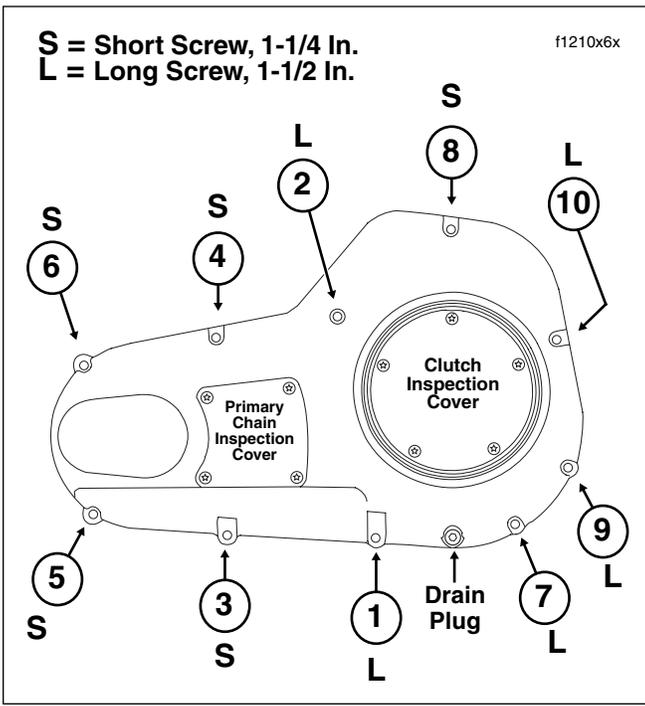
Primary Chaincase Cover Torque Sequence and Screw Size
